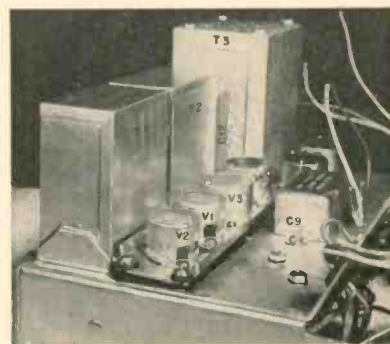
Sockets for low-level tubes are mounted on a channel strip which is flexibly mounted on the chassis to reduce microphonics.
